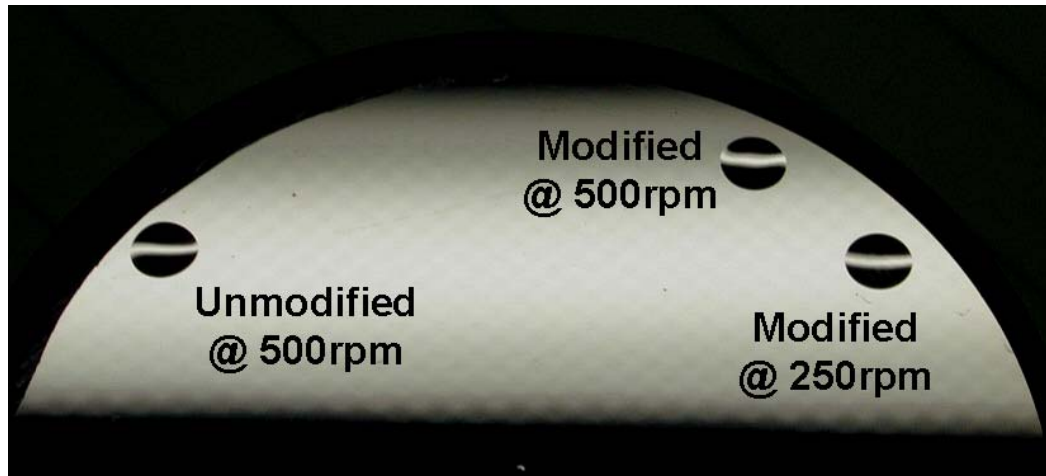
The shape of the reflection at the center of the spherical features clearly show the form error of the machined surfaces
